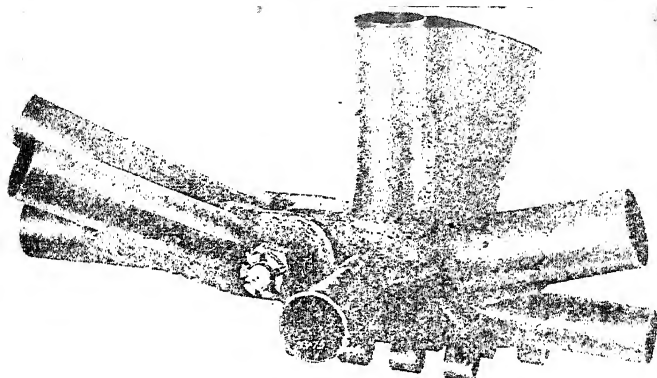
FOKKER FUSELAGE JOINT SHOWING COMBINATION OF TUBE, PLATE, AND MACHINED BAR WORK
